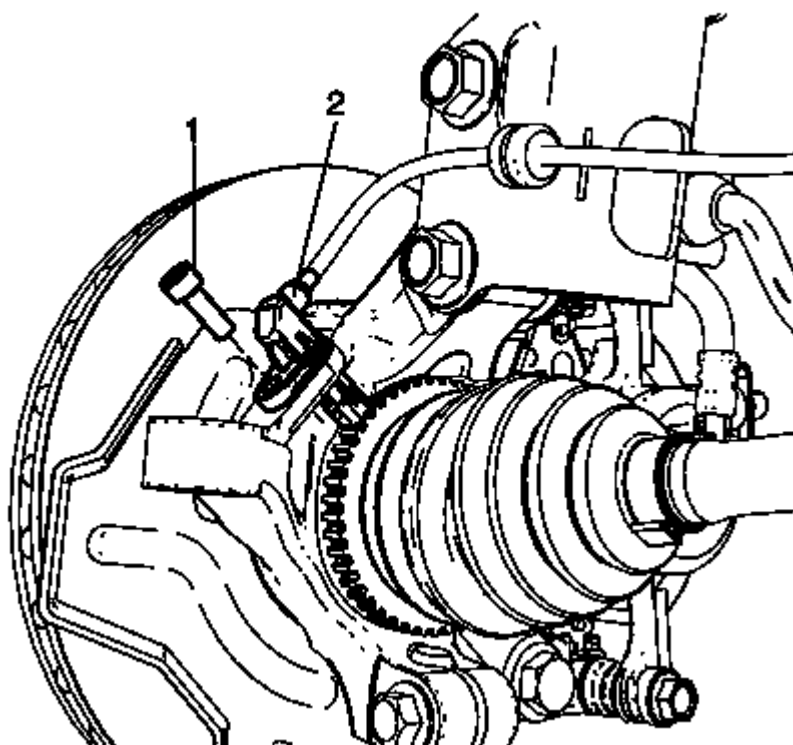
Wheel Speed Sensor To Knuckle Retaining Bolt
